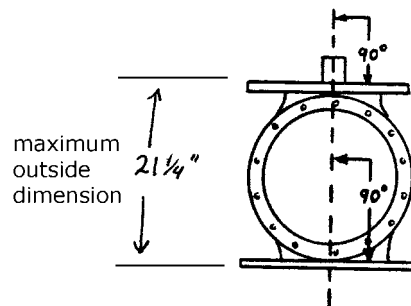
Cut must be exactly square. Plates must be welded to pumpkin so that they are precisely parallel to each other and exactly perpendicular to axle.
